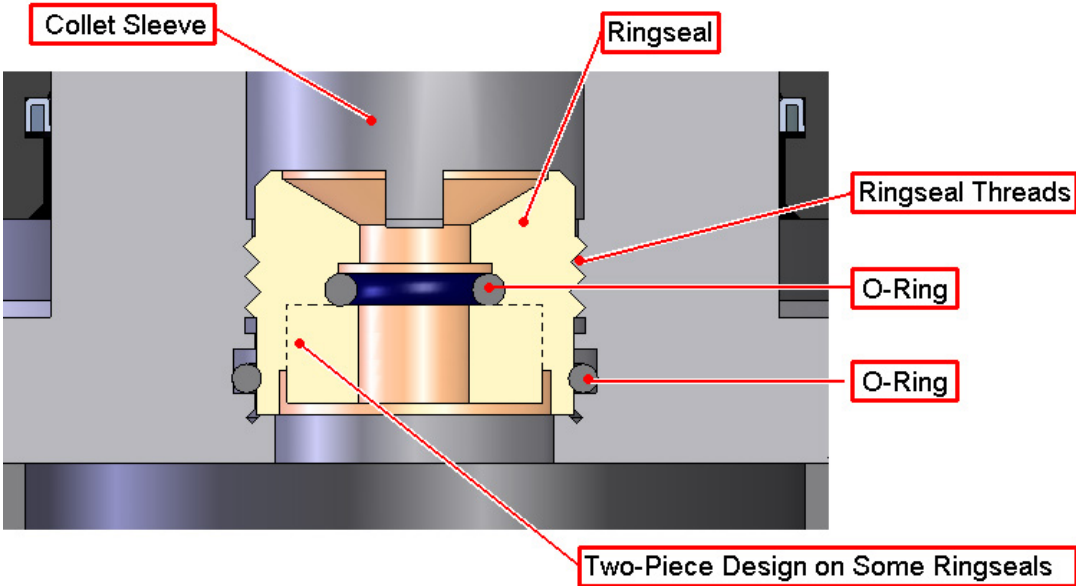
Cross-Section View of Ringseal Showing O-Ring
